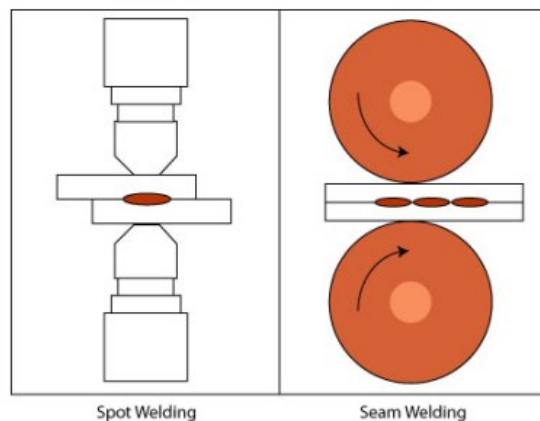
Resistance Spot Welding vs Resistance Seam welding [198]
